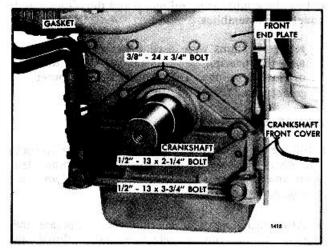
Crankshaft Front Cover Mounting (Vibration Damper Removed)
